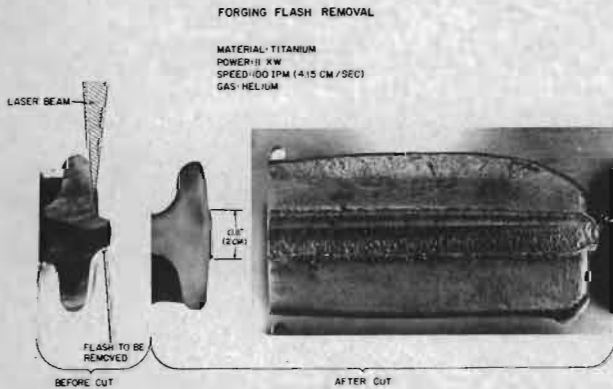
Laser cutting of flash from a titanium forging. Because no bulky cutting head is required for laser cutting, the cut edge can be located very close to the forging projections. The bandsaw quality 0.8" (2 cm) deep cut has a very narrow heat affected zone because of the high cutting speed, and is relatively free of oxide formations due to the use of a helium assist gas.
